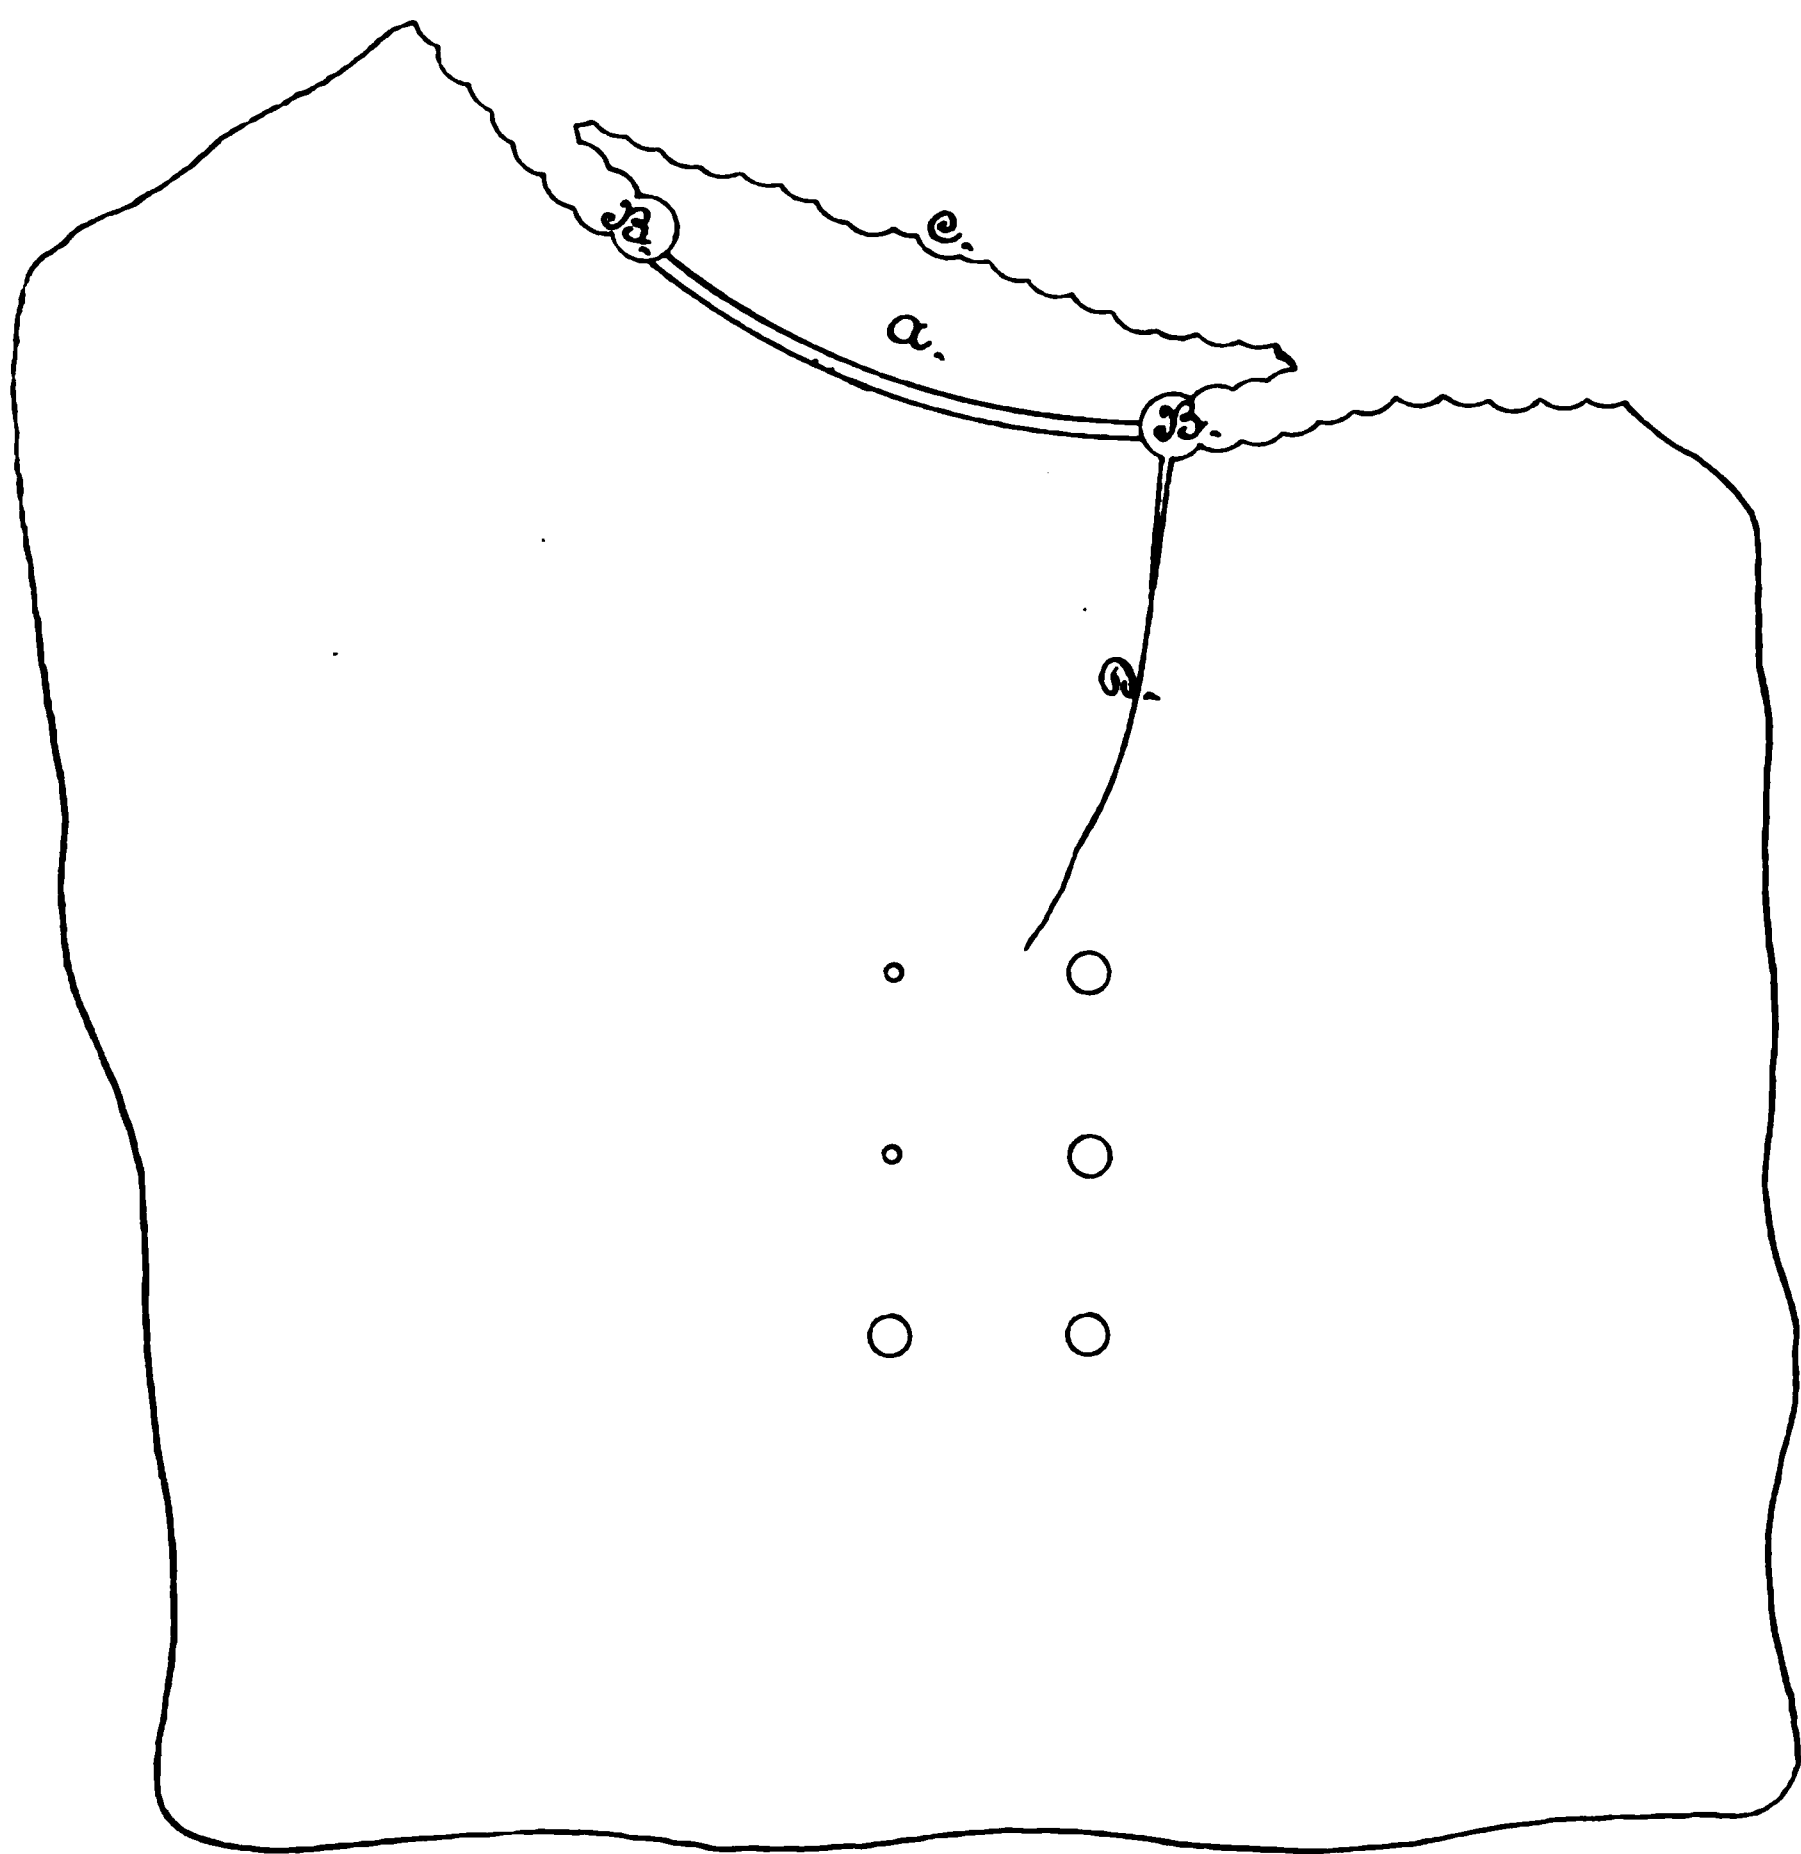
Illustrating failure of tube sheet of "Atlanta's" boiler.
